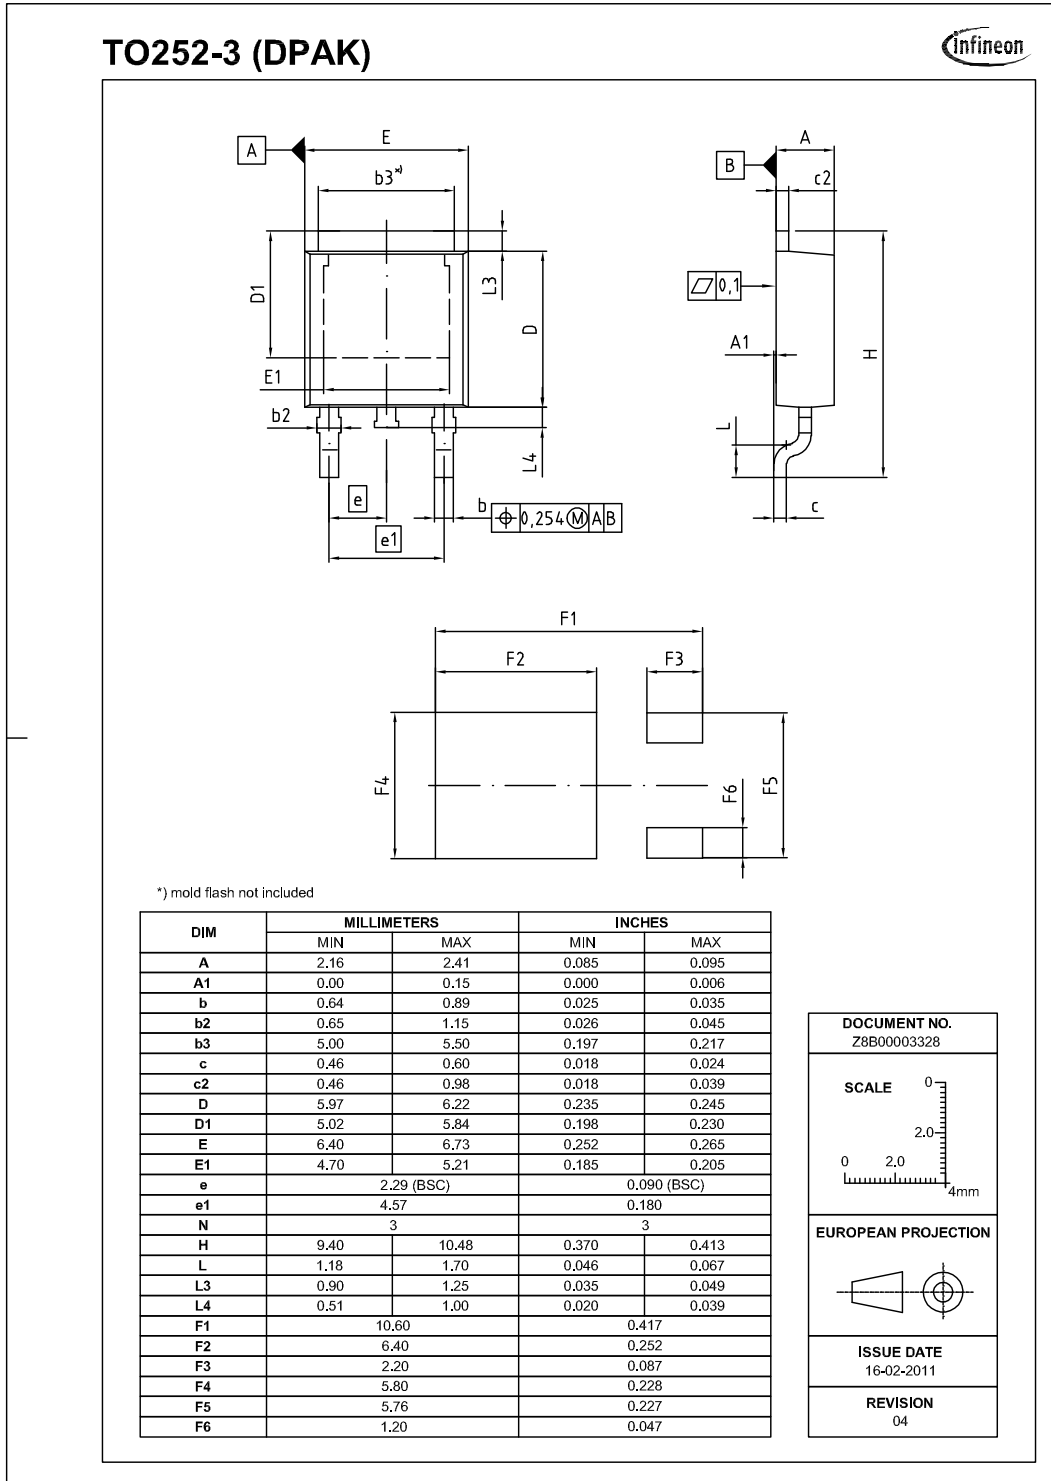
Outline PG-TO 252, dimensions in mm/inches
